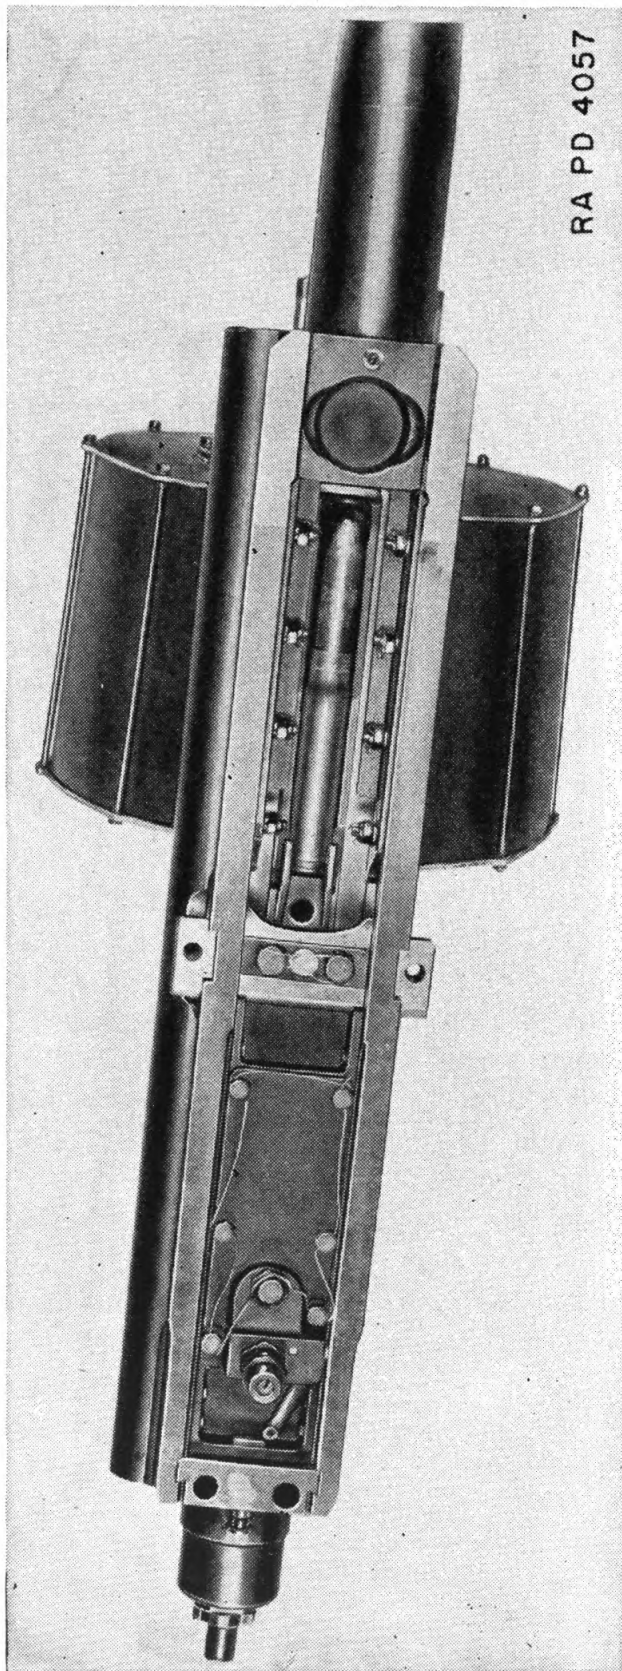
20-mm automatic gun M2, bottom view, cocked position, close-up.
